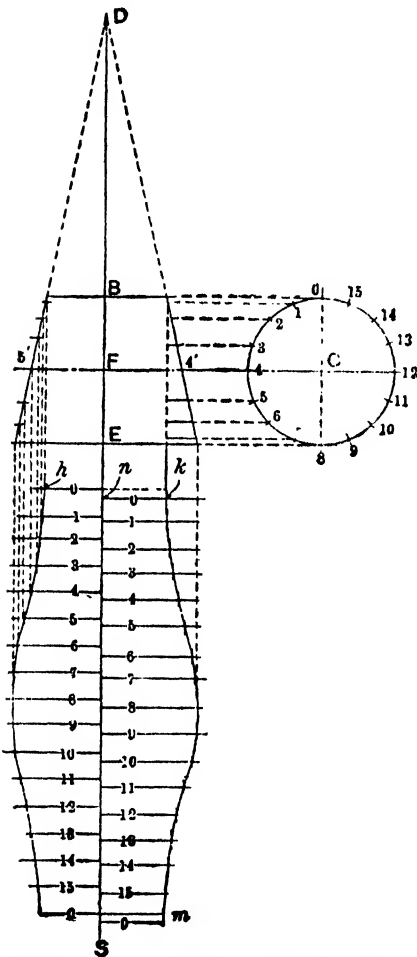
Correct Plan of One Piece, Showing Manner of Laying off Stretchout
